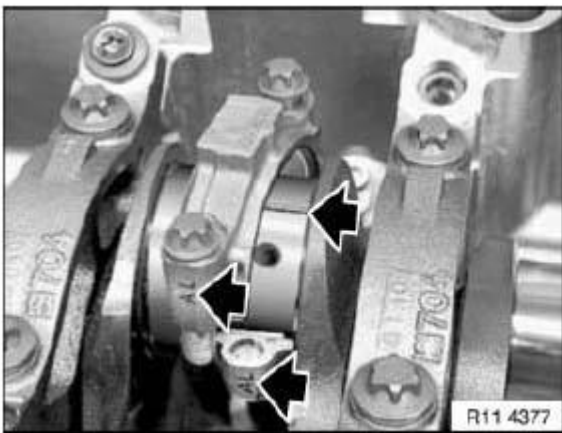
Locating Connecting-Rod Bearing Cap Mark
